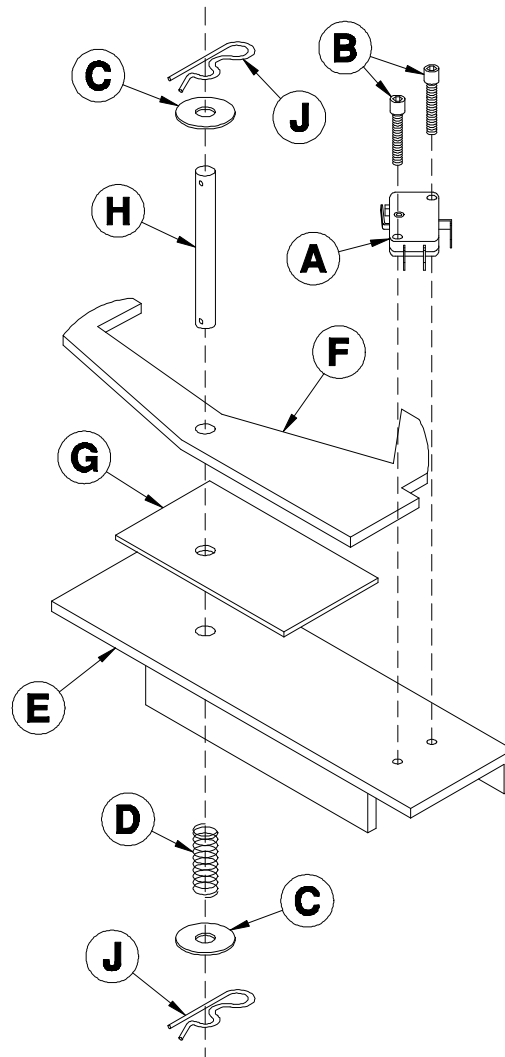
Transformer Plate Assembly (Part No. 15501-23) Exploded View
